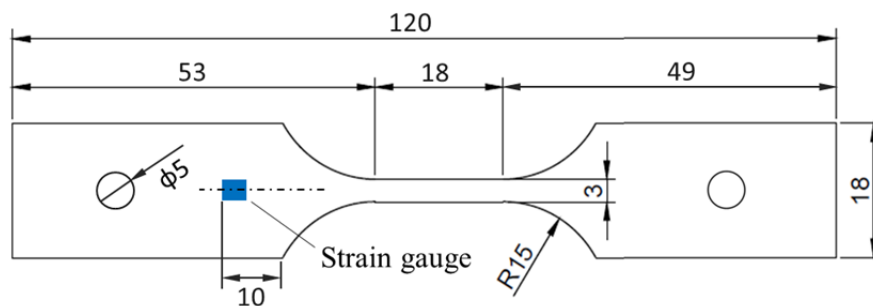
Specimen design (dimensions are in mm) with a schematic strain gauge attached
